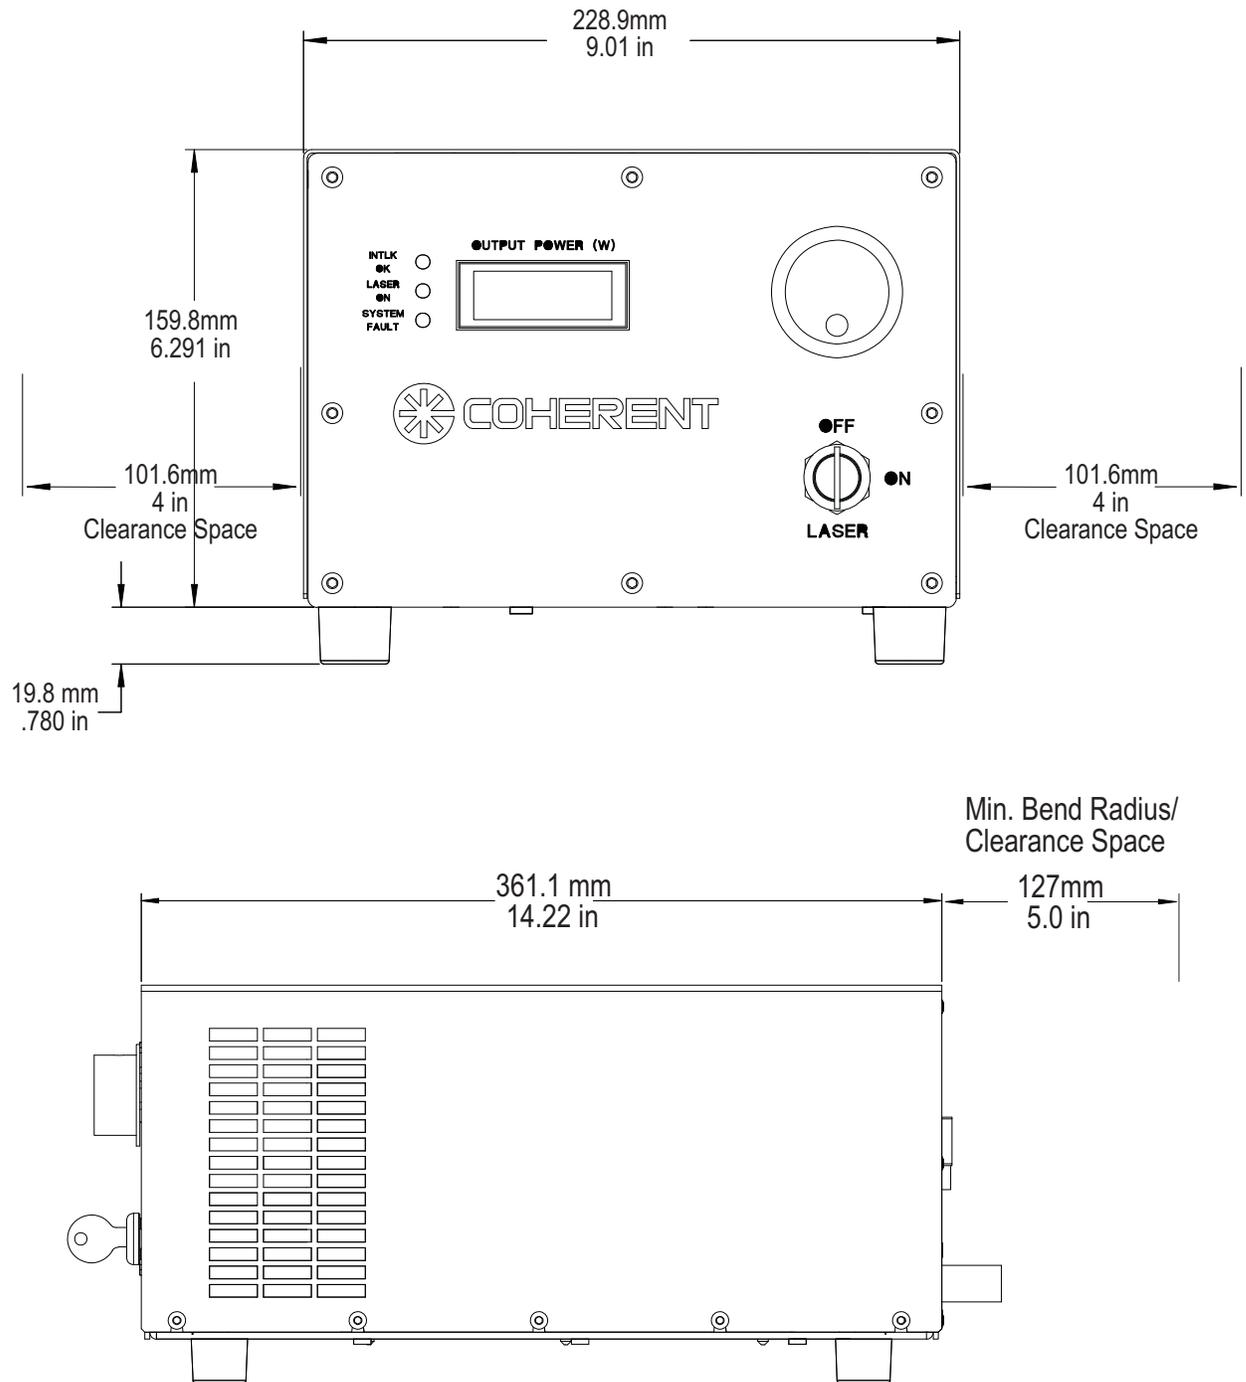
Subsystem Dimensions Benchtop Power Supply
